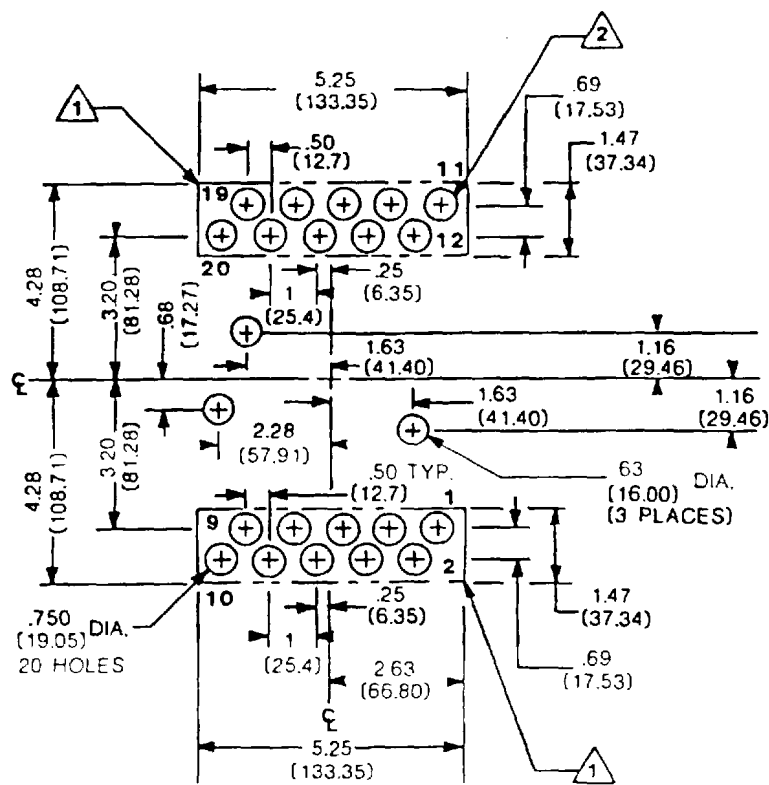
Panel Drilling Diagram (Projection Mounting)
